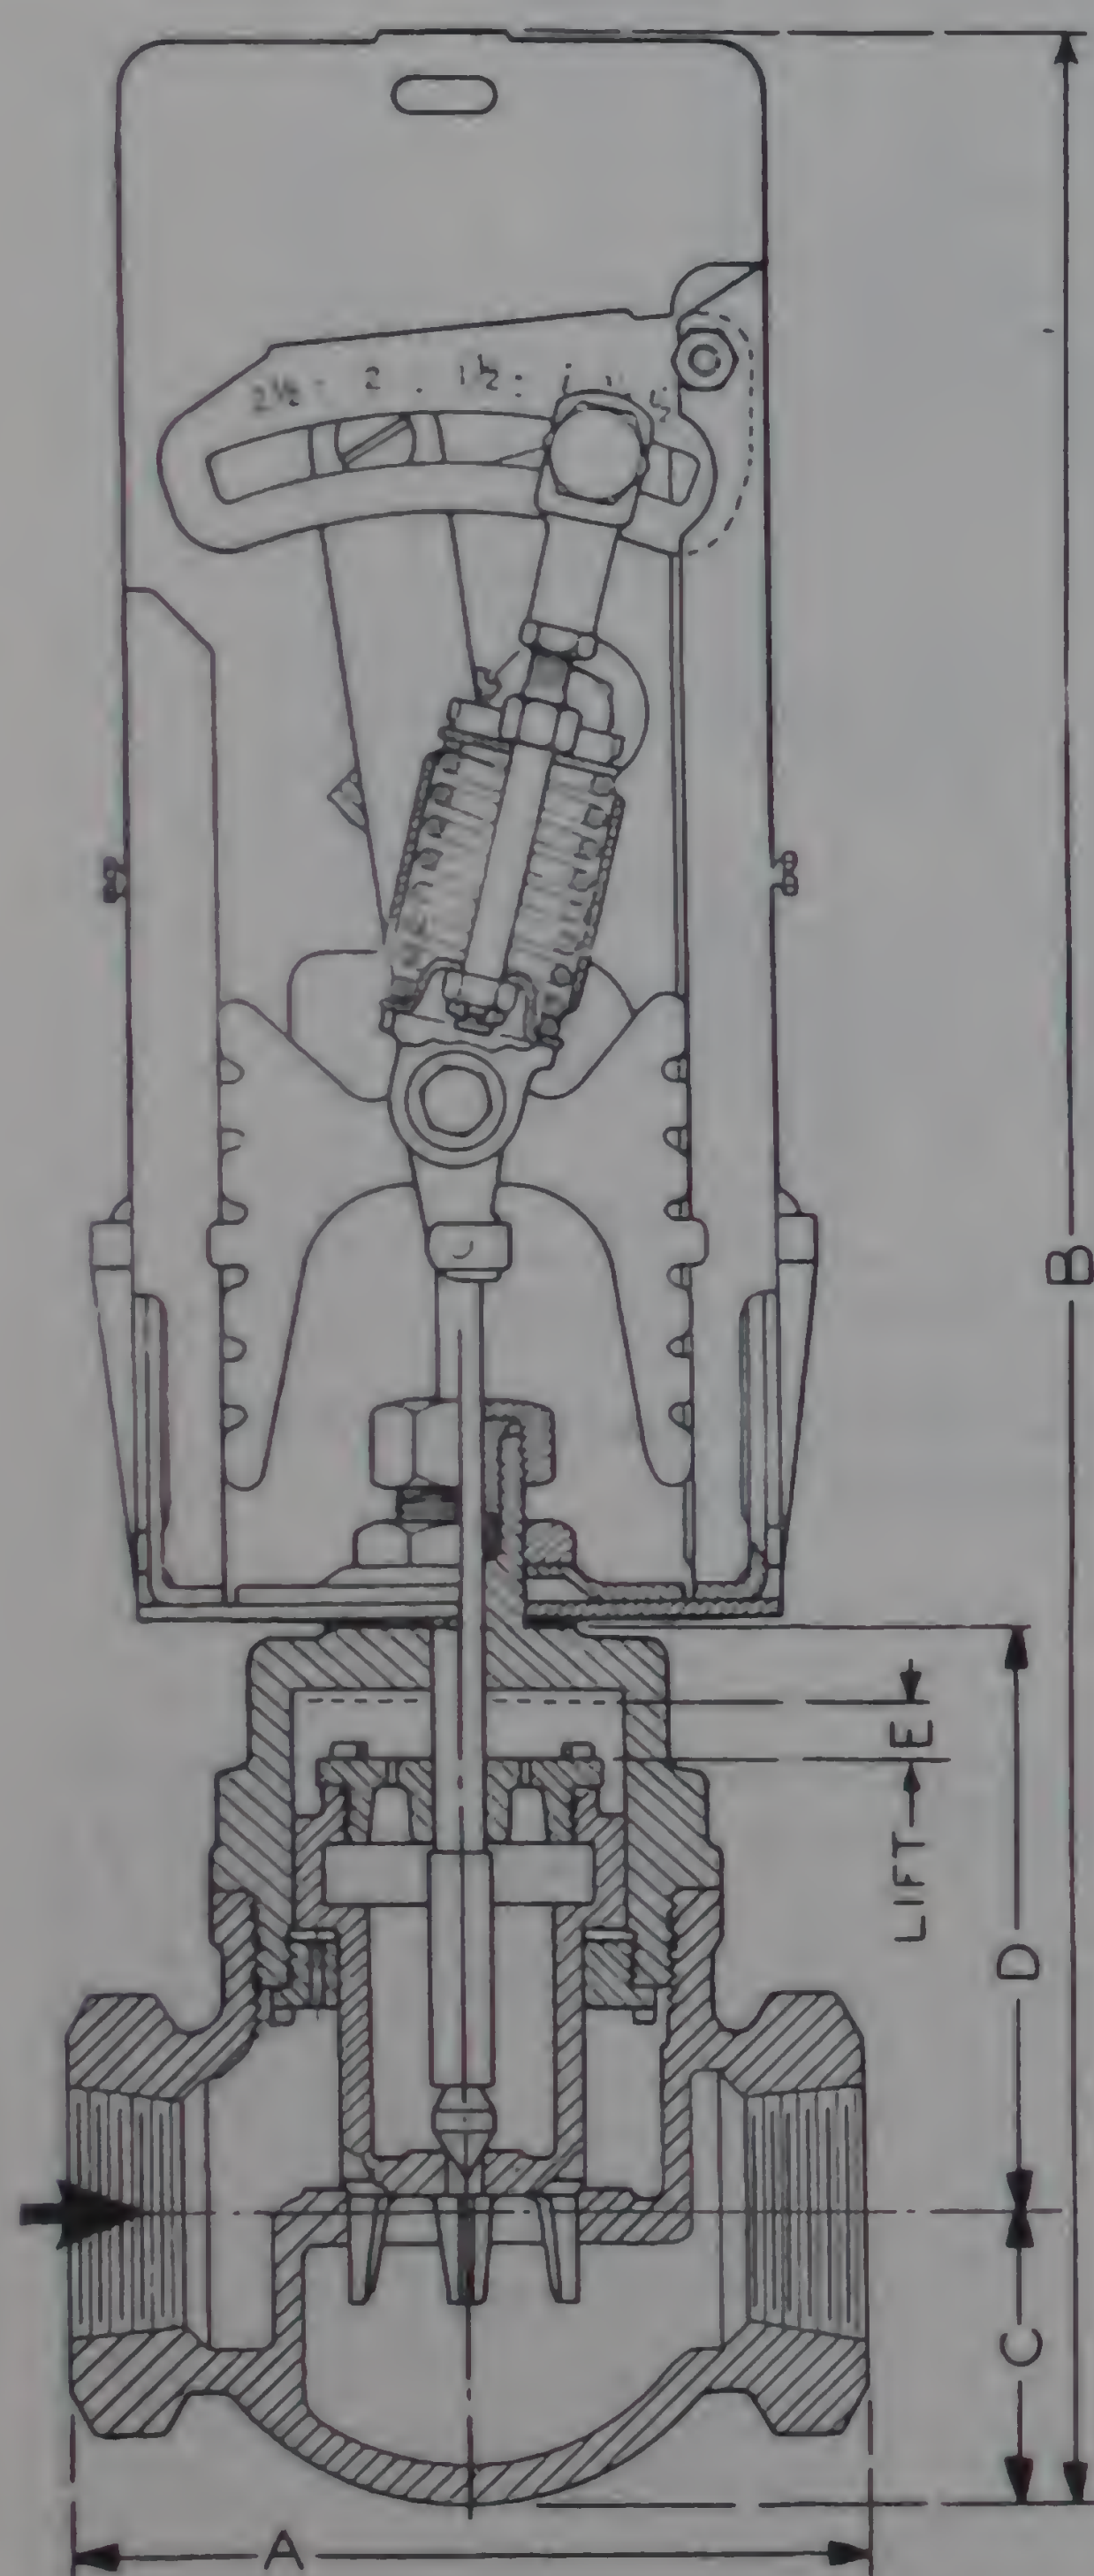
Dimensional drawing of Type K202A Motorized Valve with V58A valve body.
